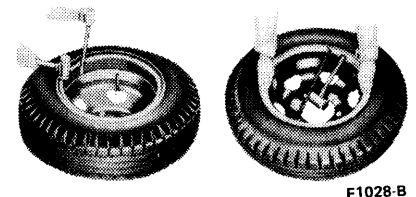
Installing and Checking Ring—Two-Piece Rim
